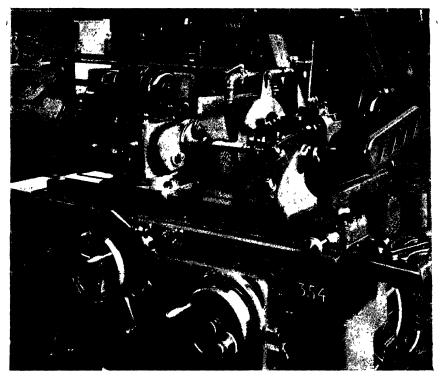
Cylindrical grinding machine set up for grinding pneumatic hammer parts (*Broom & Wade*, *Ltd*.)
